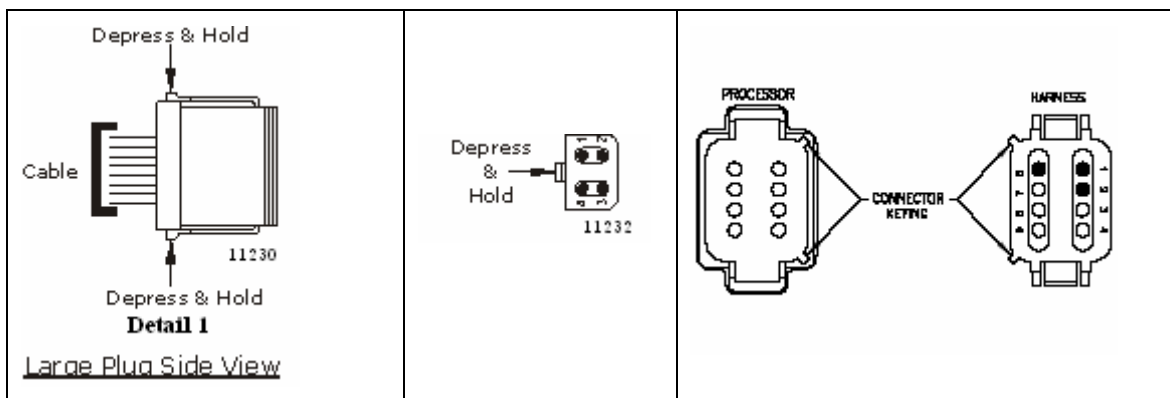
Processor Connector and Harness Plug Keying (from left, picture 3)
